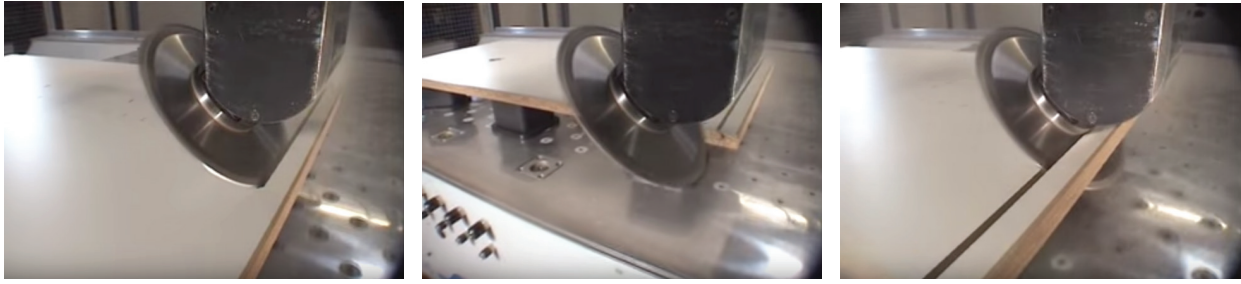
A.5: 3/4/5 Axis CNC Wood Router with Saw Blade (Combined machine)
